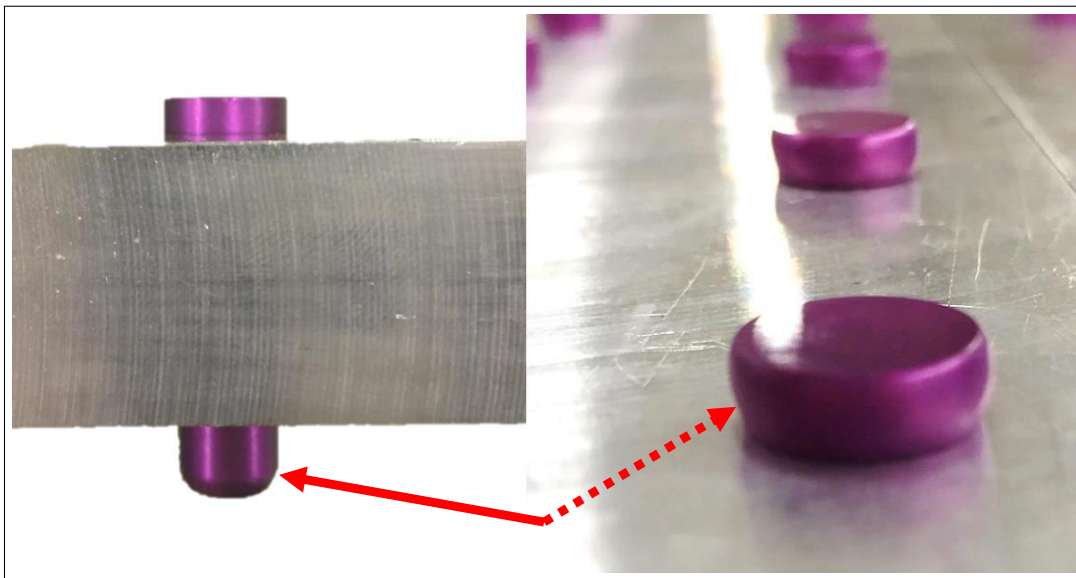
Displays the side view of a rivet prior to being formed (left), and a bottom view of the riveted tail end (right). The solid red arrow indicates the tail end, and the dashed red arrow examples how the tail end is flattened and formed into a button shape.
